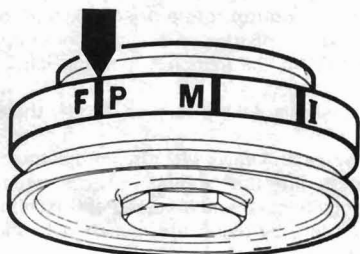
Crankshaft damper timing marks (Sec 3)
